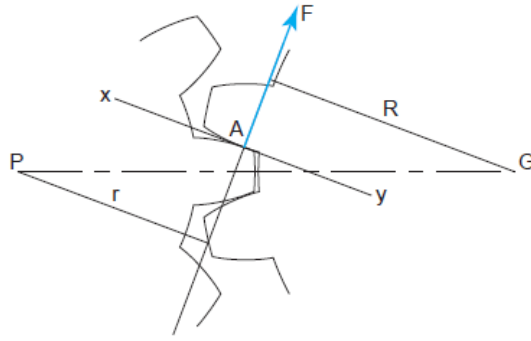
Force exerted by driving gear teeth on driven gear teeth [22].
